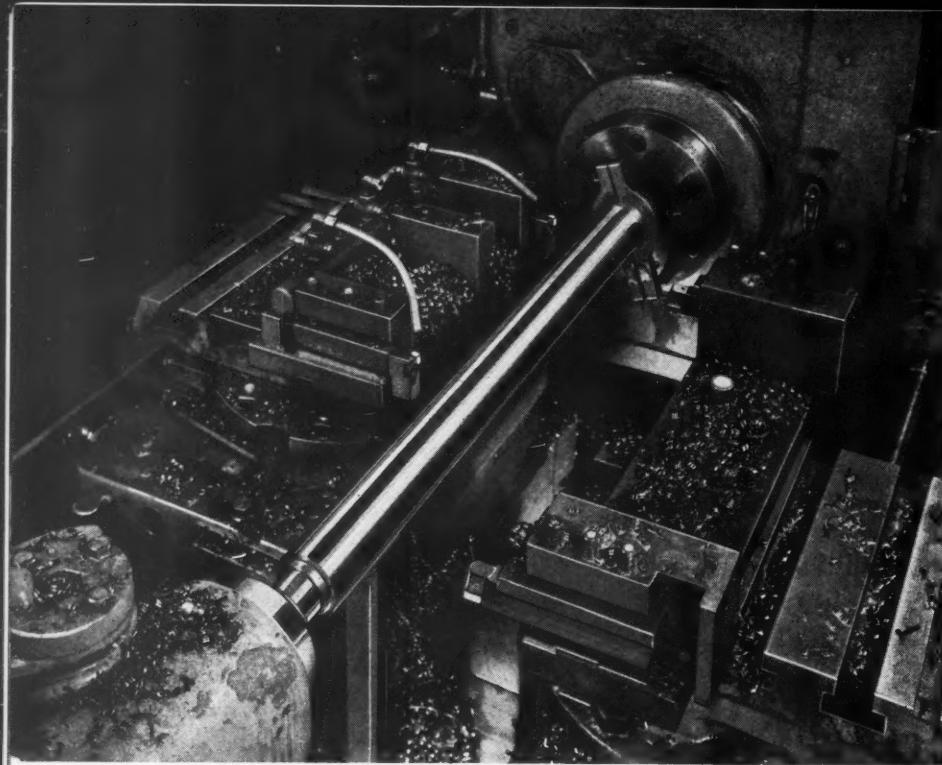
Two solid carbide tool bits on the front slide and two carbide-tipped tools on the rear slide are employed to turn the main cross-drive shafts.
